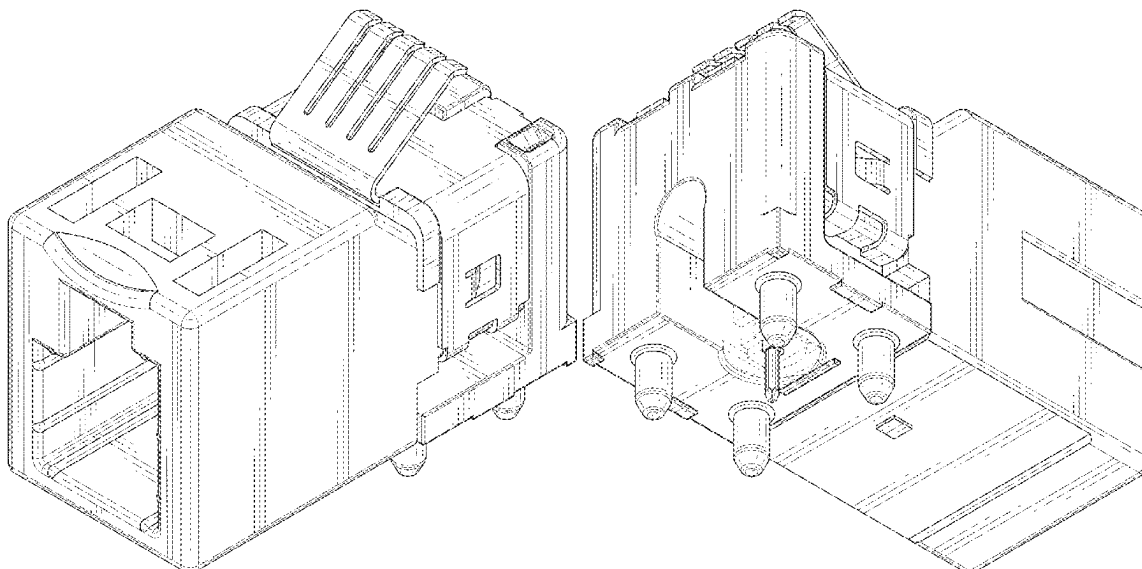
is a rear, bottom, and left side perspective view thereof;
